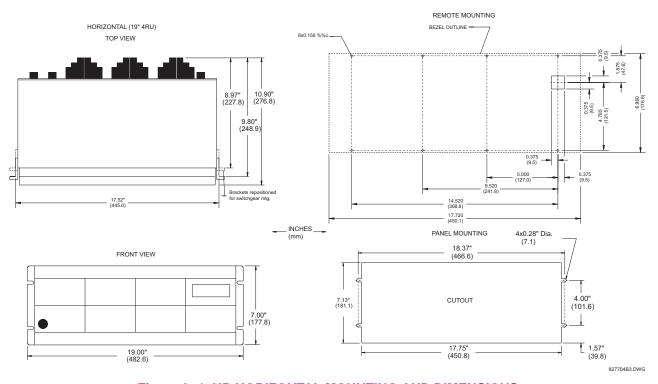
UR HORIZONTAL MOUNTING AND DIMENSIONS
